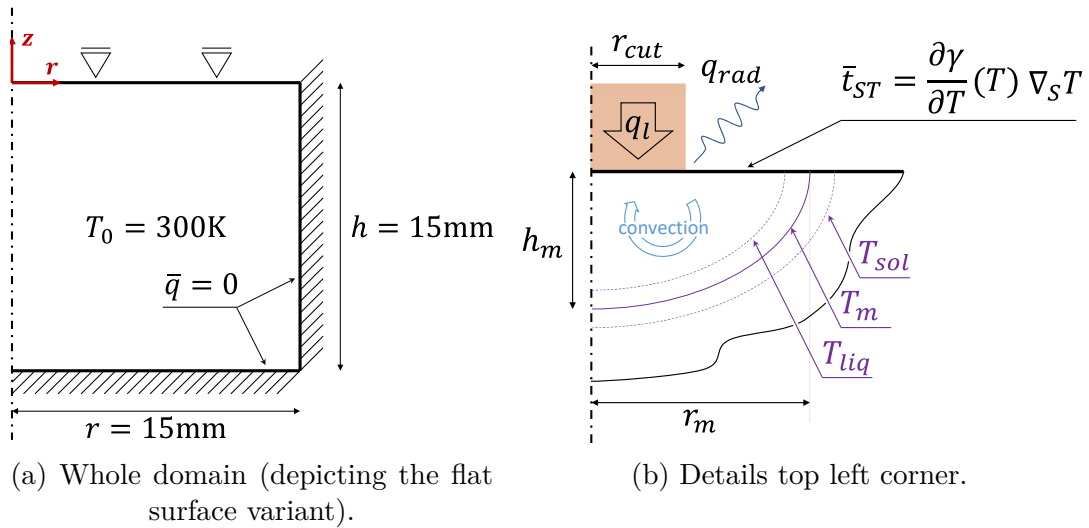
Schematic of laser beam welding by Saldi [12].
